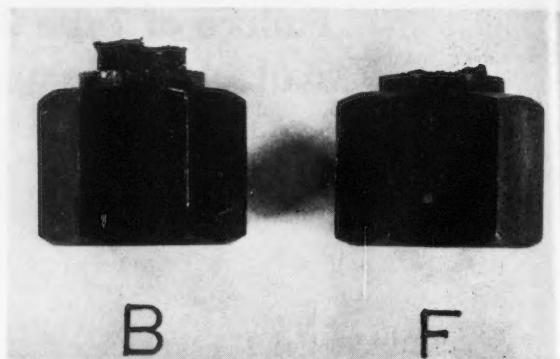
Side view on Type 316 stainless steel nuts B and F.
